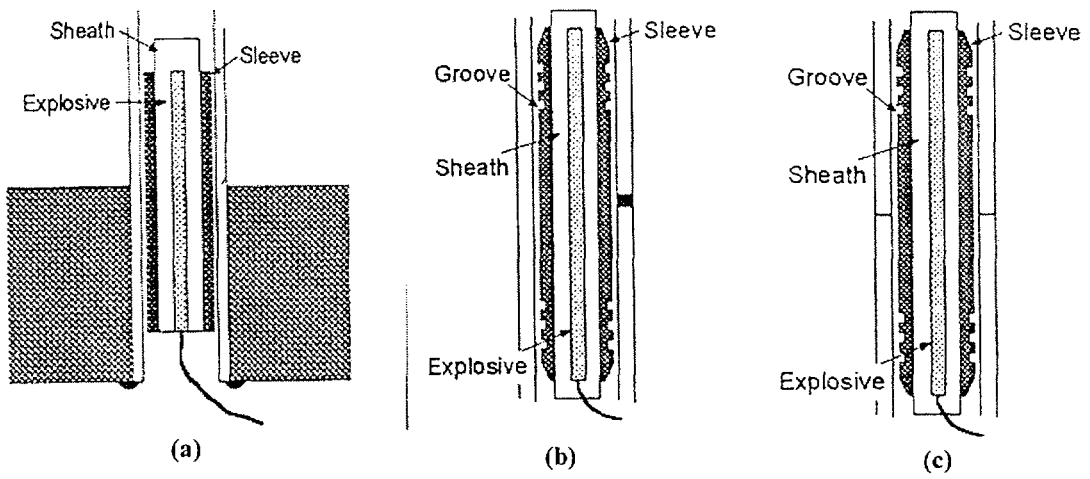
Explosive Welded Sleeve; (a) Tubesheet, (b) Tube Support Plate, (c) Others Degraded Position.
